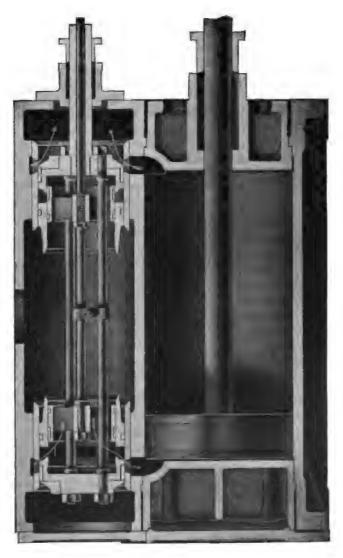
Buckeye Cylinder, with Double Piston-valves.
